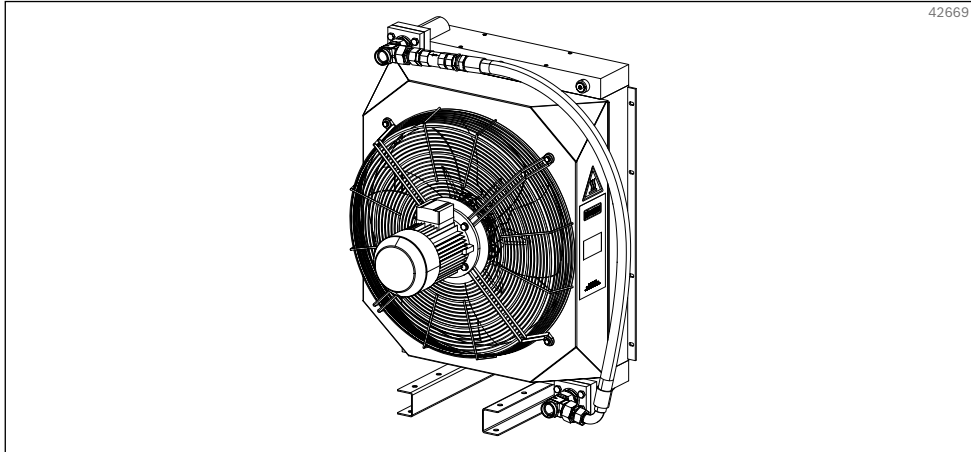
Mounting of air-oil cooler HDC 080 with by-pass
